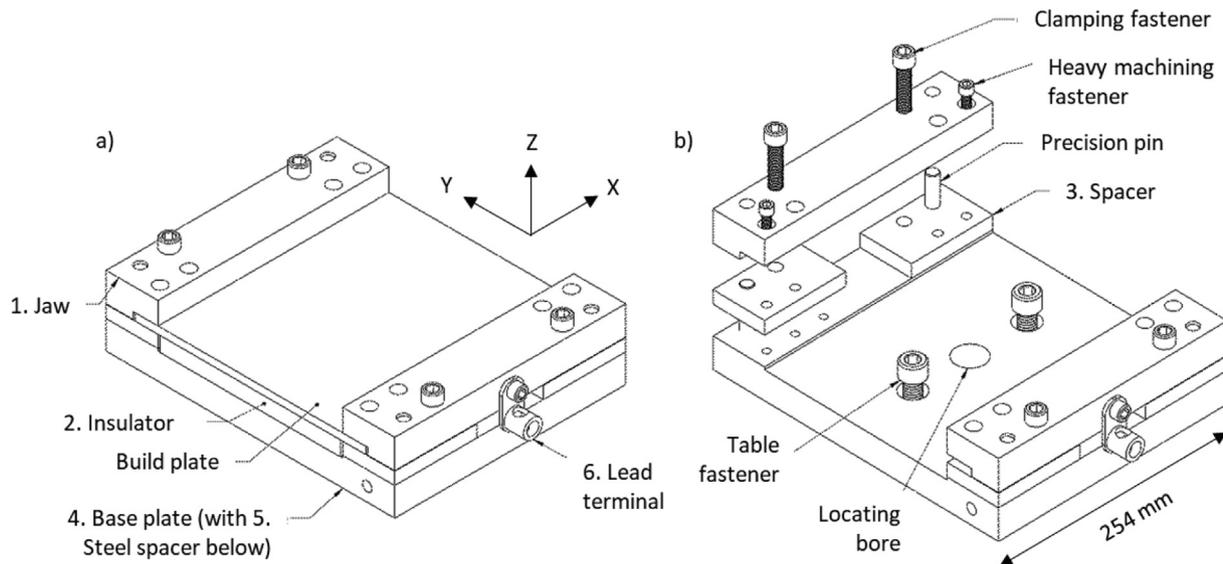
A) Limited-constraint fixture; b) exploded view (insulator and build plate are not shown).
